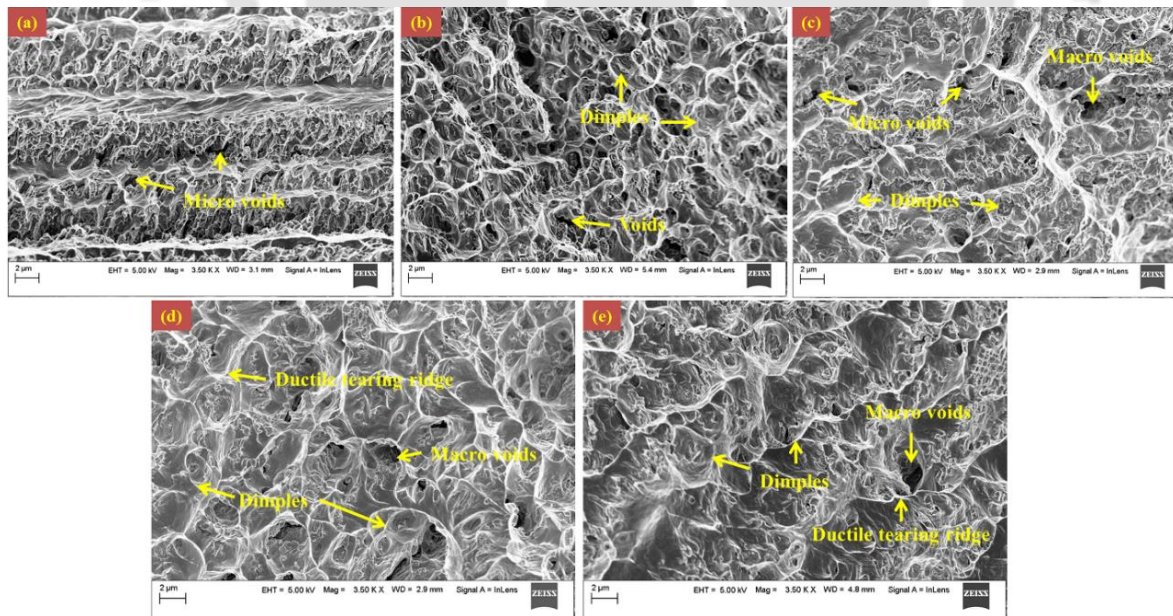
Tensile fractography of the (a) PD1, (b) PD2, (c) PD3, (d) PD4 and (e) PD5 welding conditions
